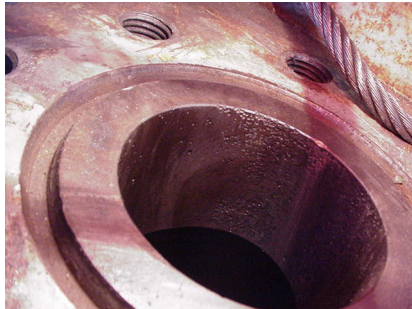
Damage at the outlet flange of the balance chamber
